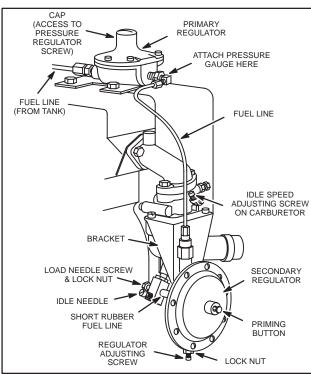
ADJUSTING CARBURETOR, LP FUEL SYSTEM
